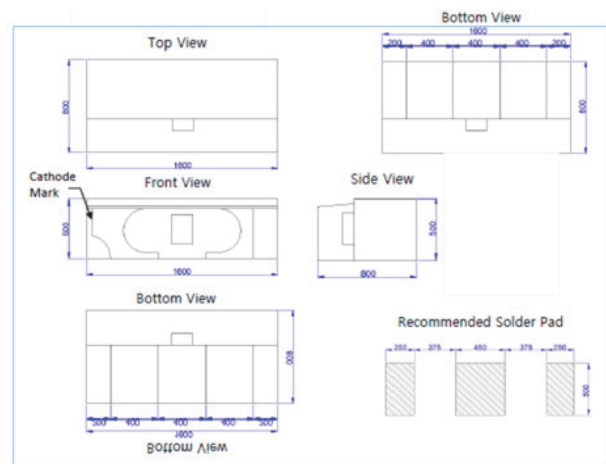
Silicon molded lens SMD type semiconductor laser diode device drawing and solder pattern design using BT resin printed circuit boards.
